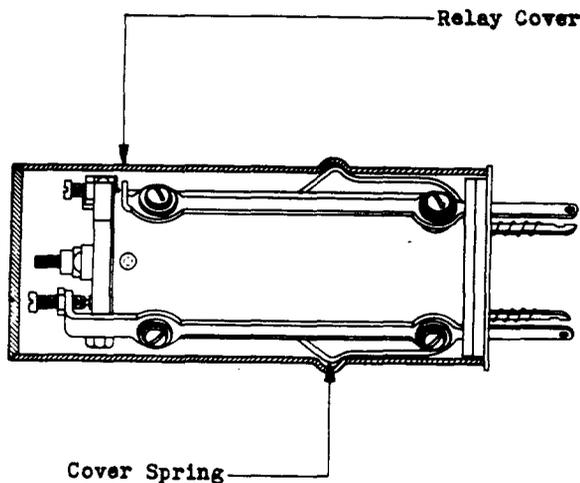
Cover and Cover Springs Used on 126- and 174-Type Relays
